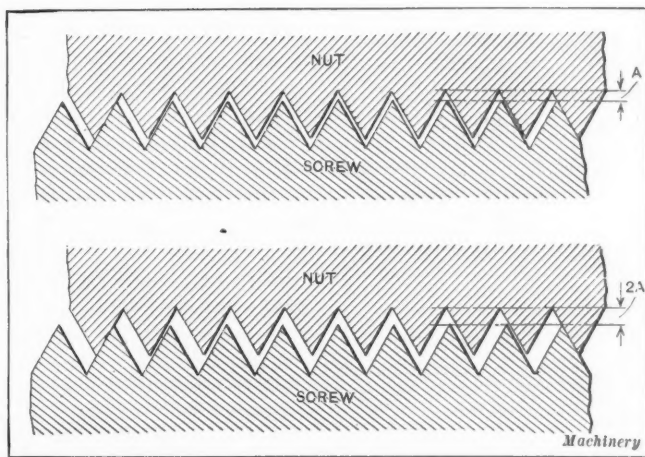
Upper Illustration shows Condition when Lead of Thread in Nut is Correct and Lead of Screw Thread is Inaccurate; Lower Illustration shows Condition when Lead of Thread in Both Nut and Screw is Inaccurate, with the Errors in Opposite Directions
